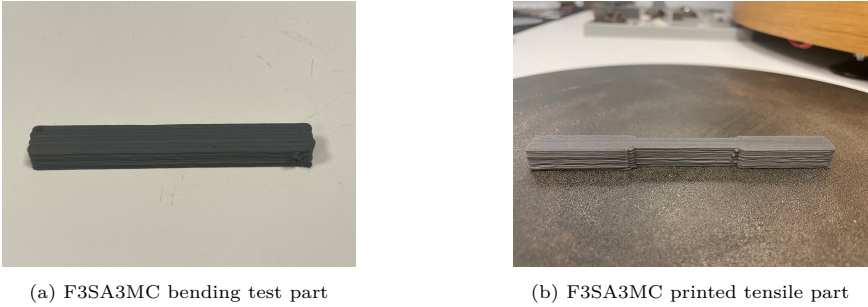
F3SA3MC 3D printed parts: (a) Bending (EN843-1) and (b) Tensile specimen (ASTM E8/E8M)
